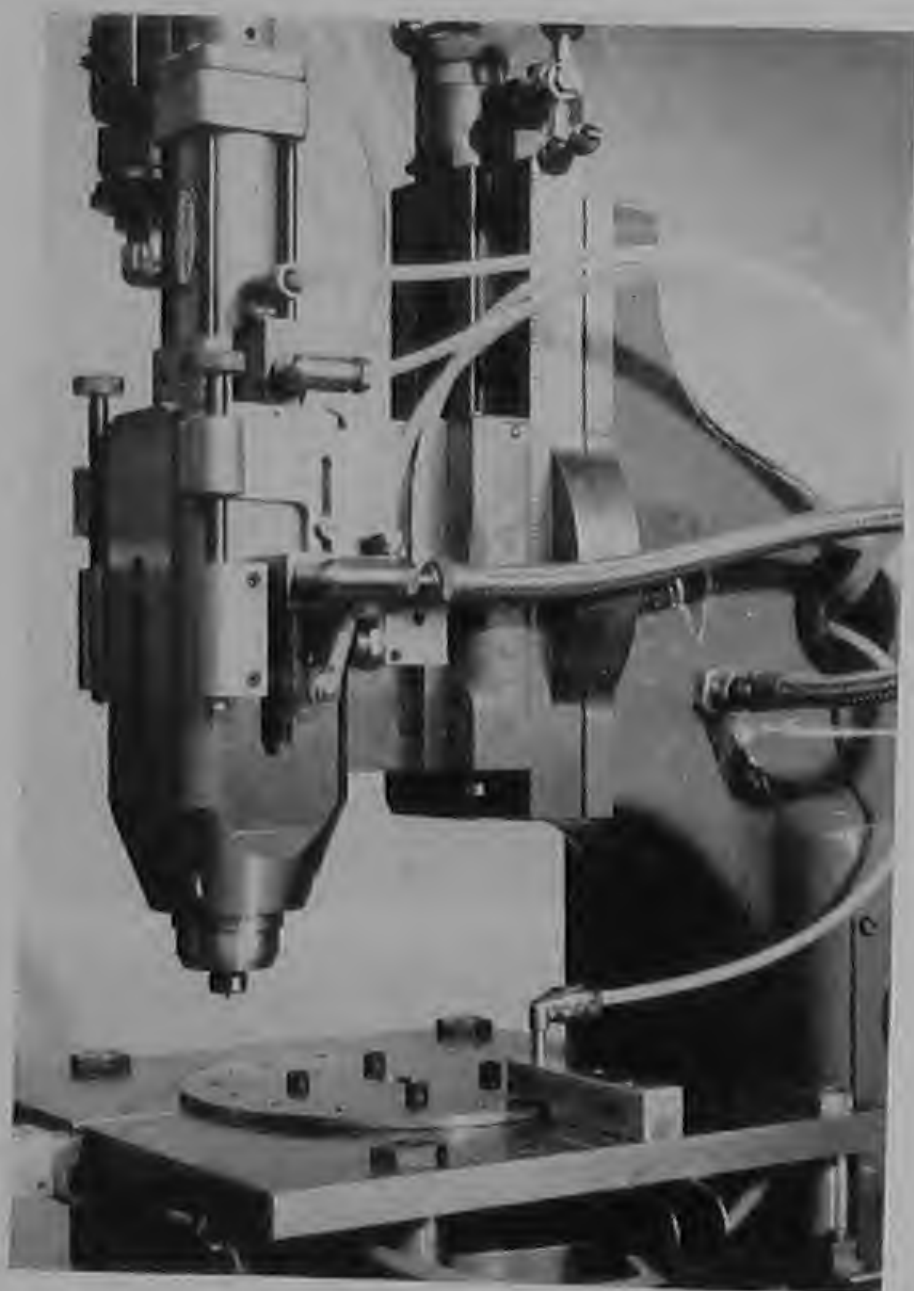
Westwind brass jet drilling machine with air turbine drilling spindle with aerostatic bearings
